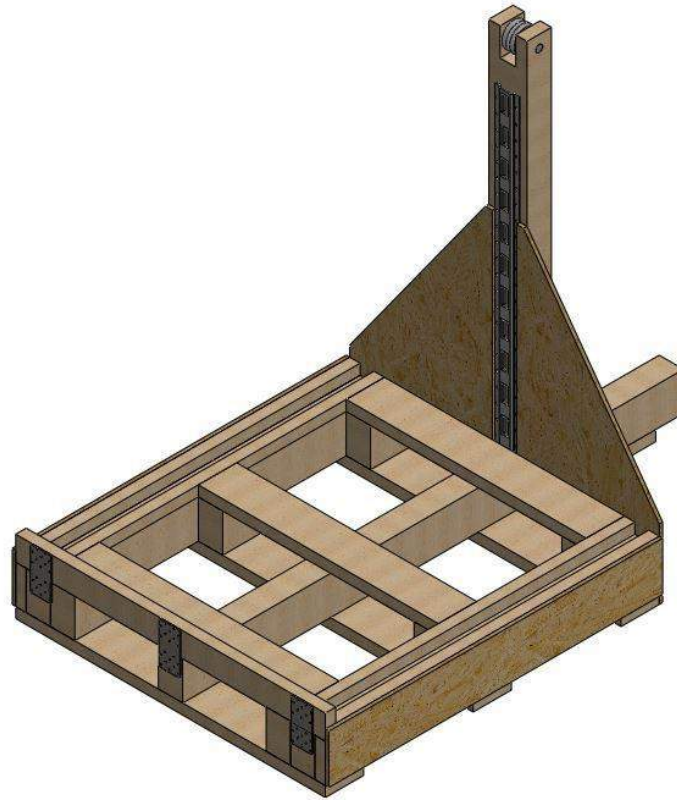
Updated Final Design of Base Frame (Winch is not shown in this Base Frame Assembly)
